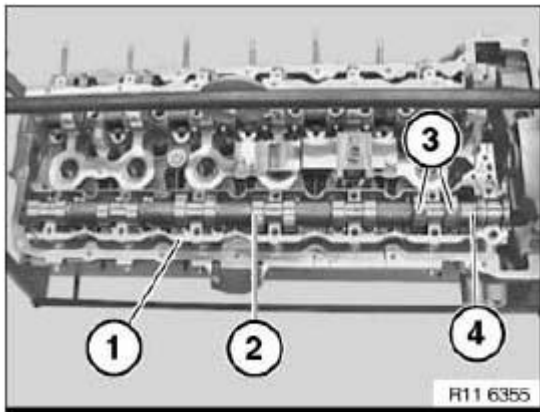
Identifying Lower Bearing Bank, Camshaft, Exhaust Camshaft, Cams And Part Number
